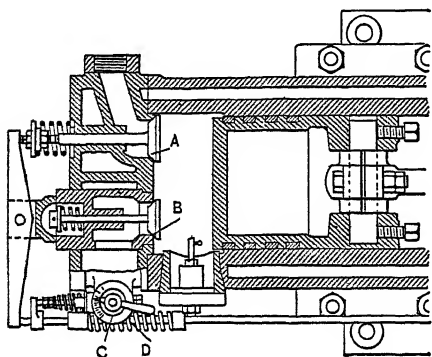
Cross section of cylinder and valves of the Wayne engine.
